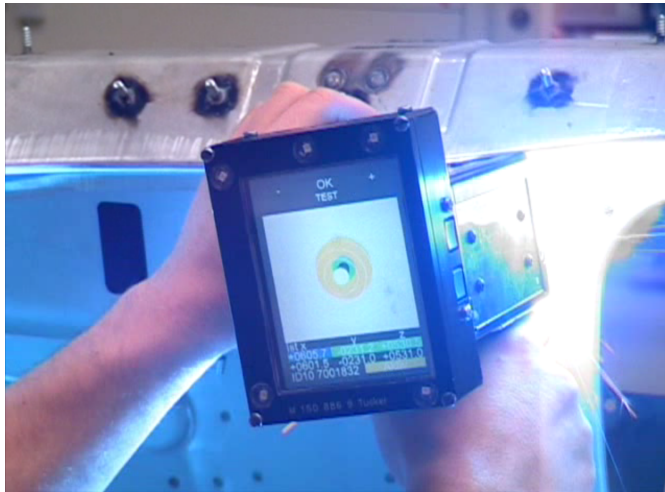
Intelligent welding gun. The display shows guidance information indicating the next stud-welding position. Some already welded studs can be seen in the upper part of the image.
